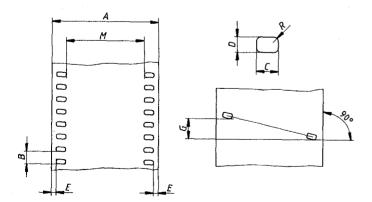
Perforating dimensions of papers in rolls, used in phototypesetting and photolettering devices
